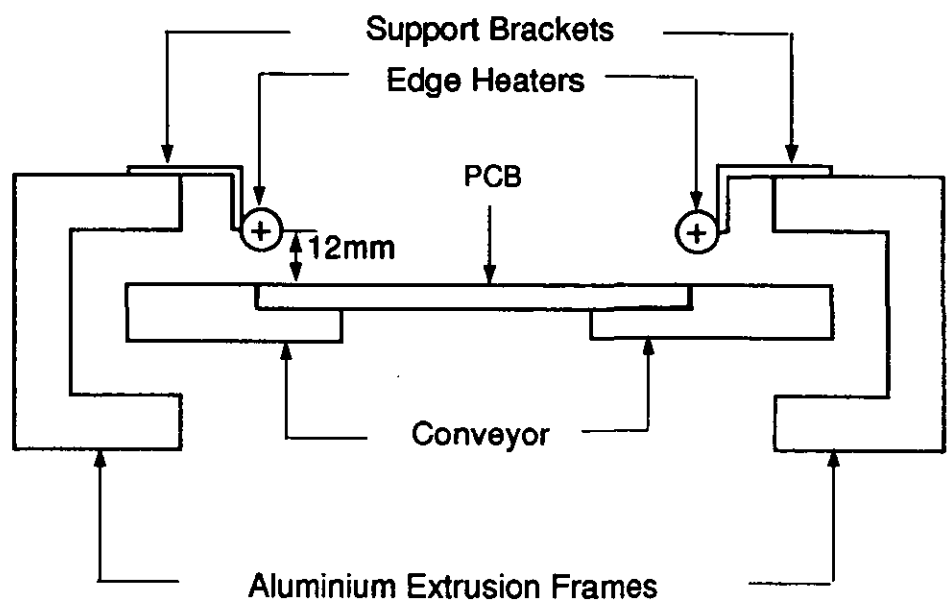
Cross section of the conveyor/edge heaters set-up
